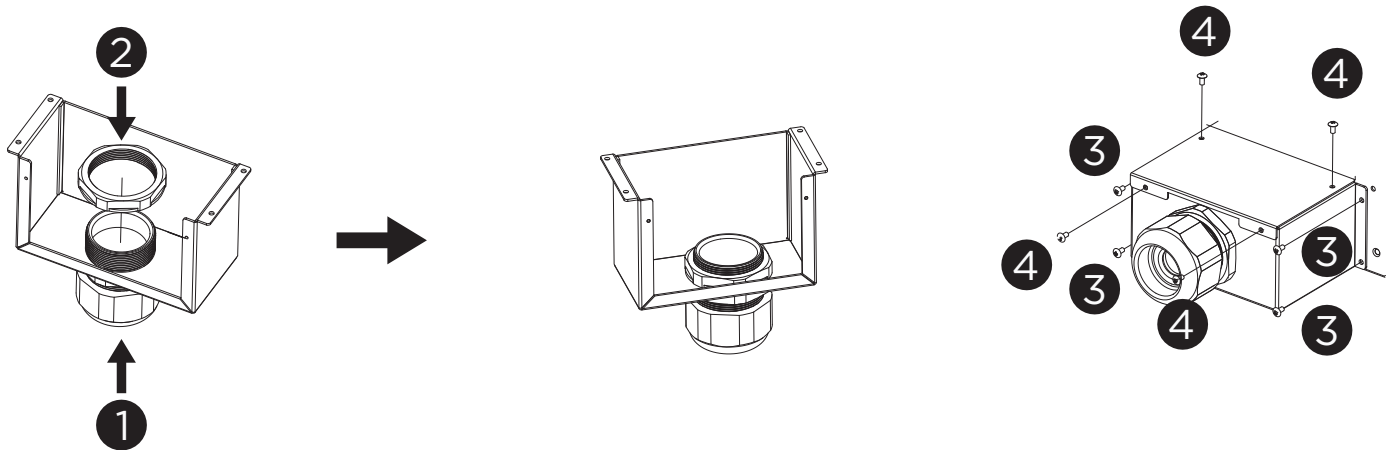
Wiring Cover installation (One CABLE GLAND)
